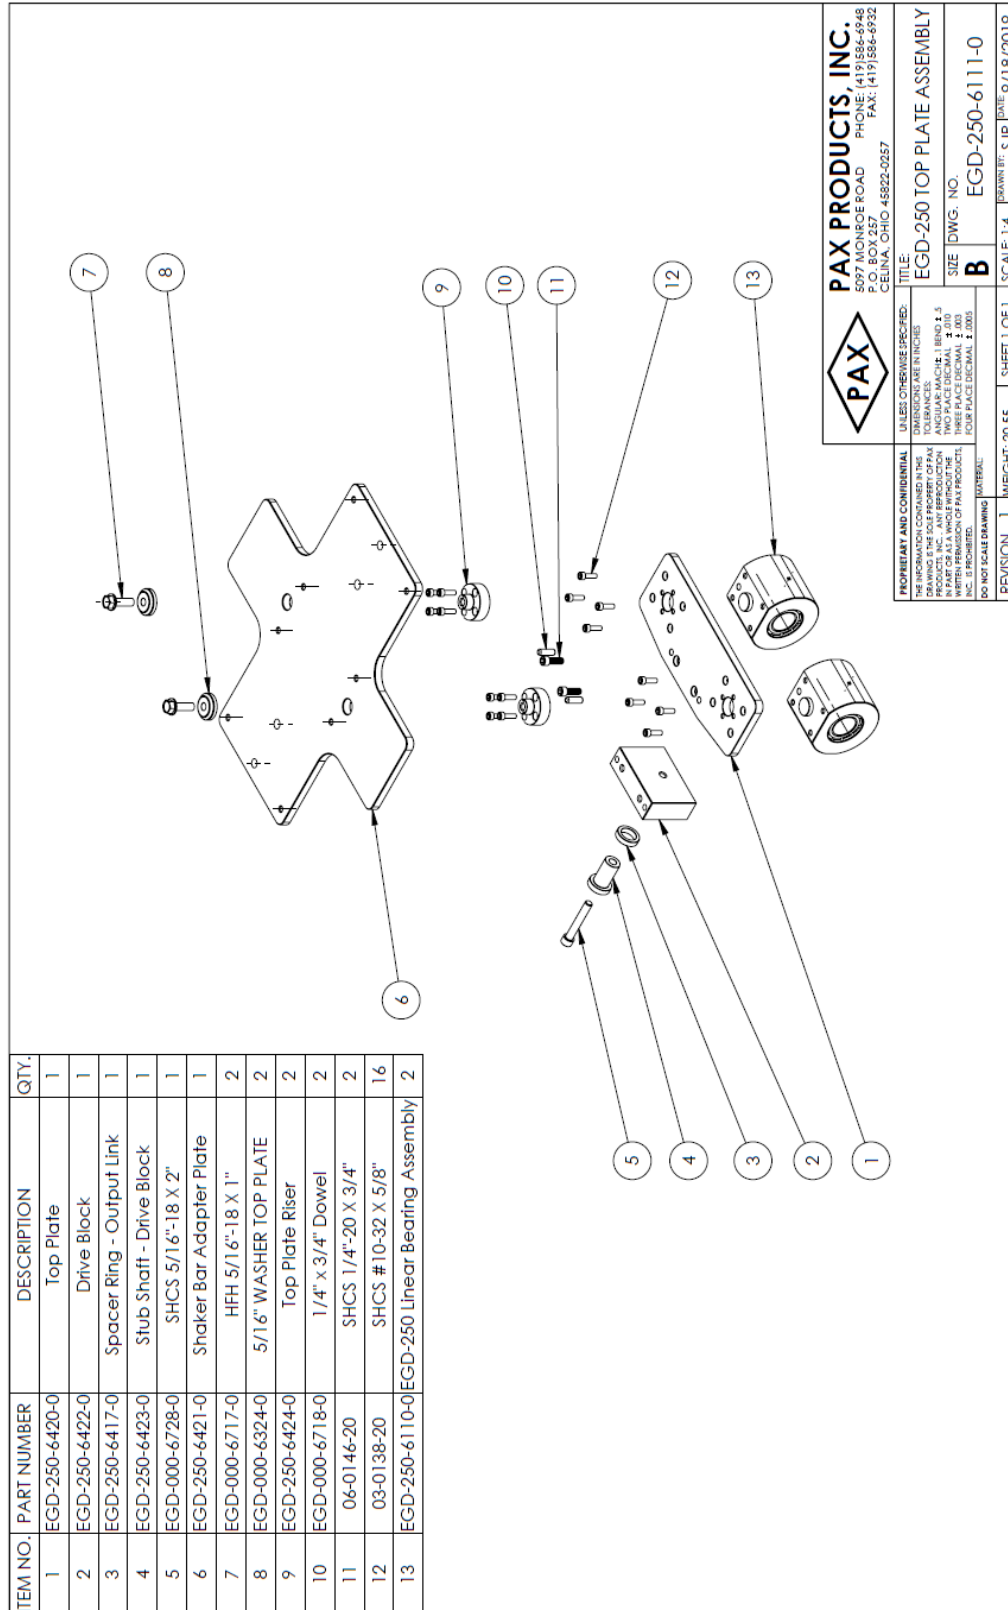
EGD-250 TOP PLATE ASSEMBLY
